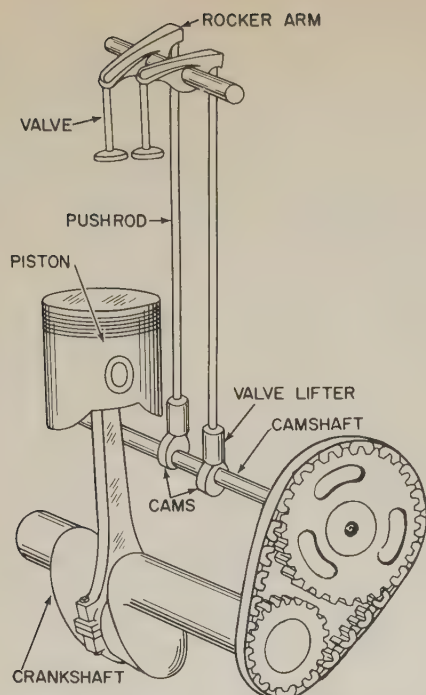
Valve-operating mechanism for an I-head, or overhead-valve, engine.
